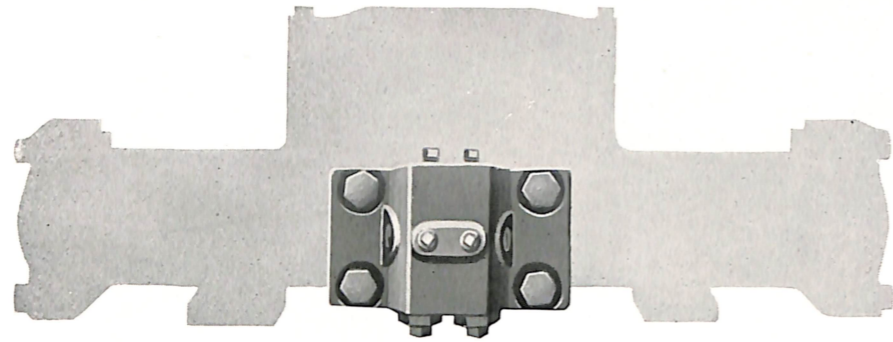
Type "E" Folding Door Engine, showing location of Ball Checked Valve.
